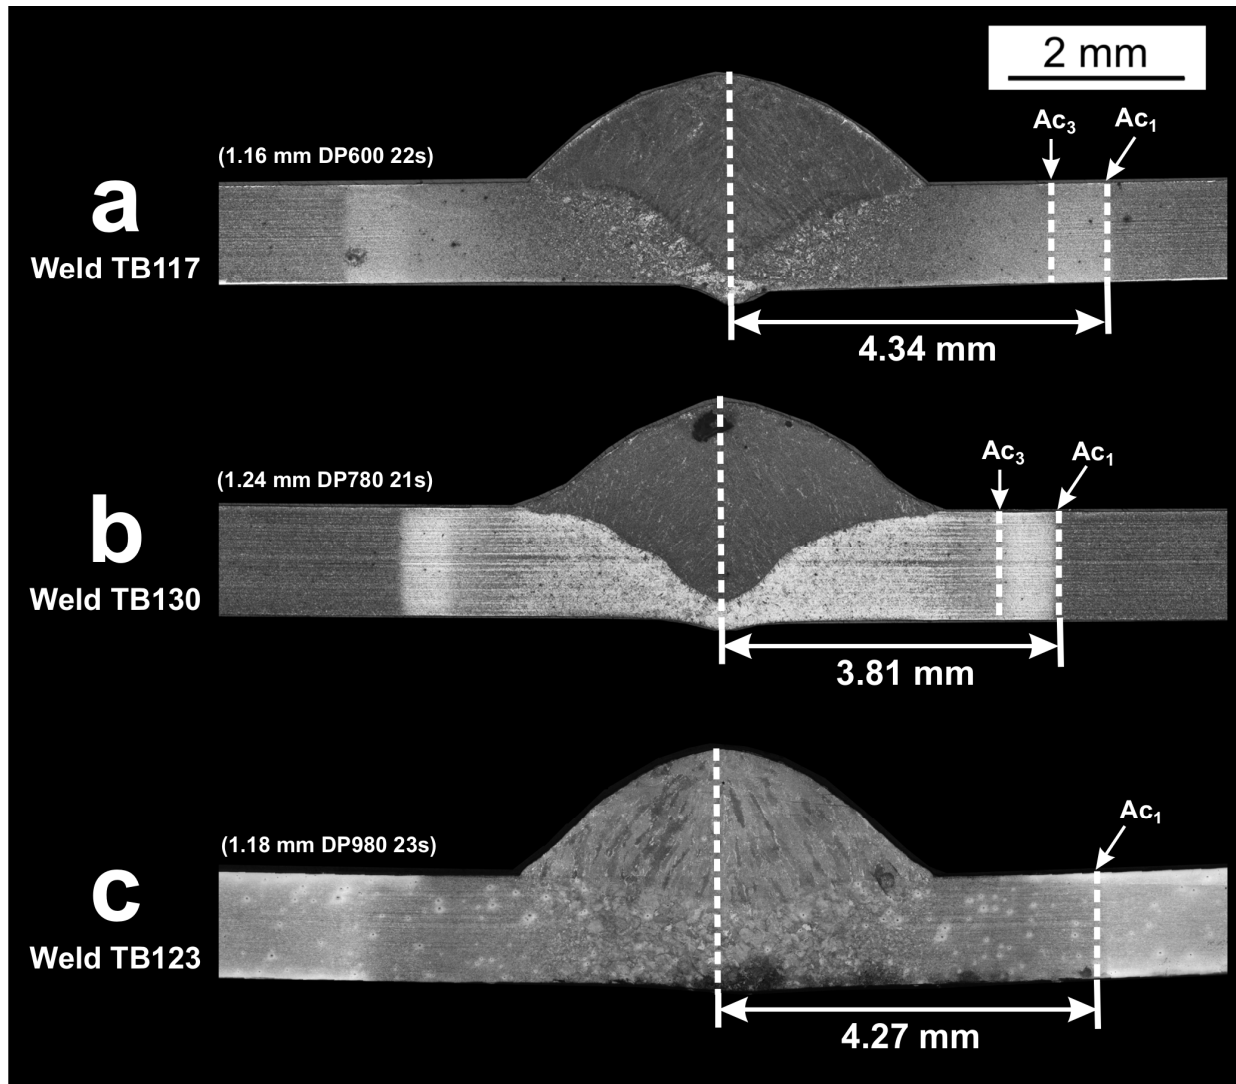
A comparison between three welds that were made with the same weld parameters but were on different sheet steels. The weld in a) was made on DP600 ‘22s’ sheet steel (1.16 mm thick), the weld in b) was made on DP780 ‘21s’ sheet steel (1.24 mm thick), and the weld in c) was made on DP980 ‘23s’ sheet steel (1.18 mm thick). (2% Nital etch).
